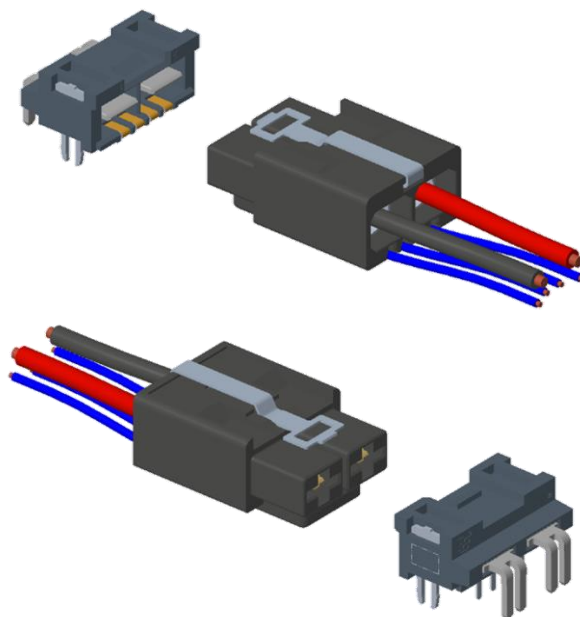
48VHPWR Plug Mating with a 48HVPWR Header
